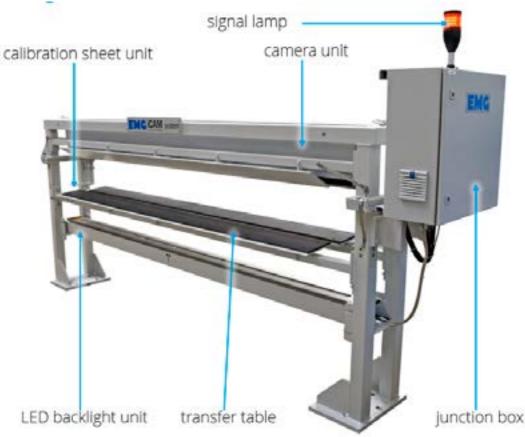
EMG iCAM[®] measuring system - camera modules in the upper part, light sources (backlight unit) in the lower part
